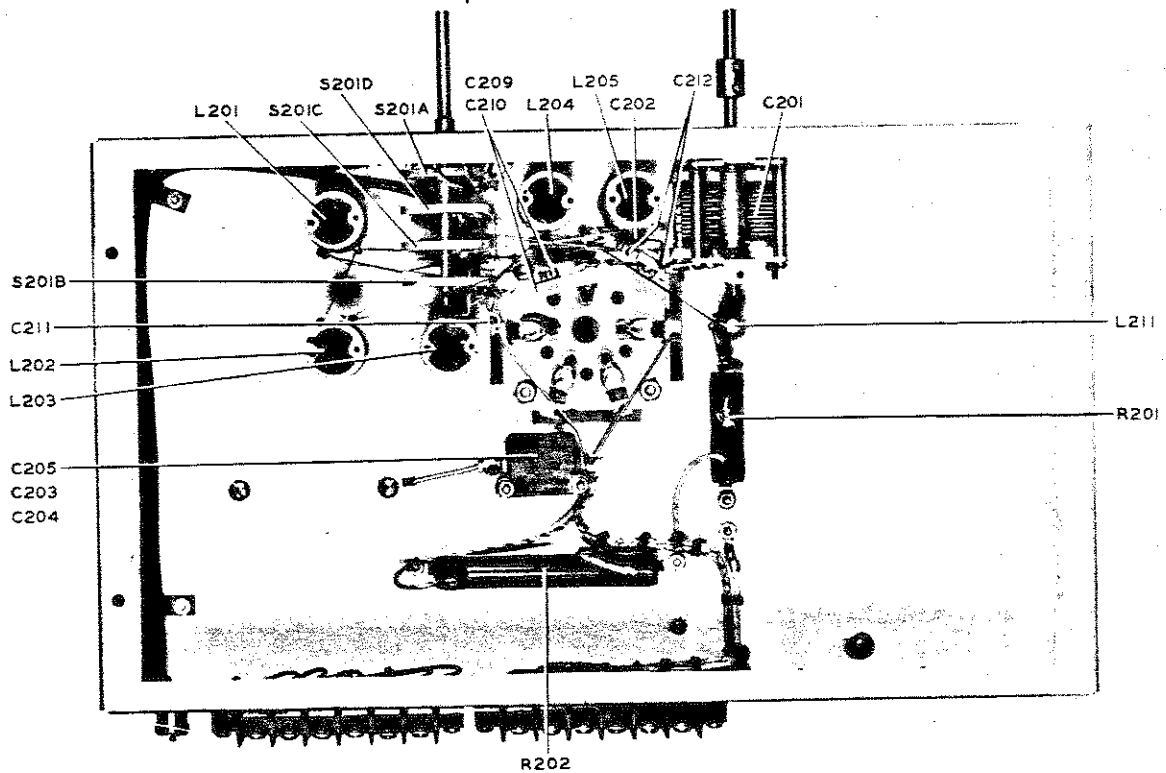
POWER AMPLIFIER TUBE CHASSIS, BOTTOM VIEW
